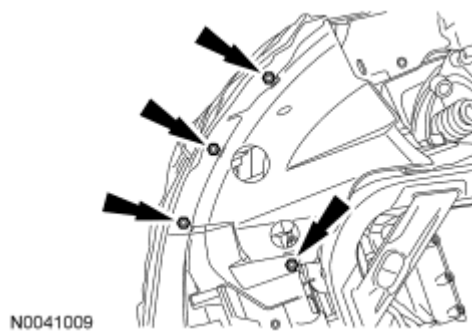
Locating Bolts On Rear Transaxle Insulator
